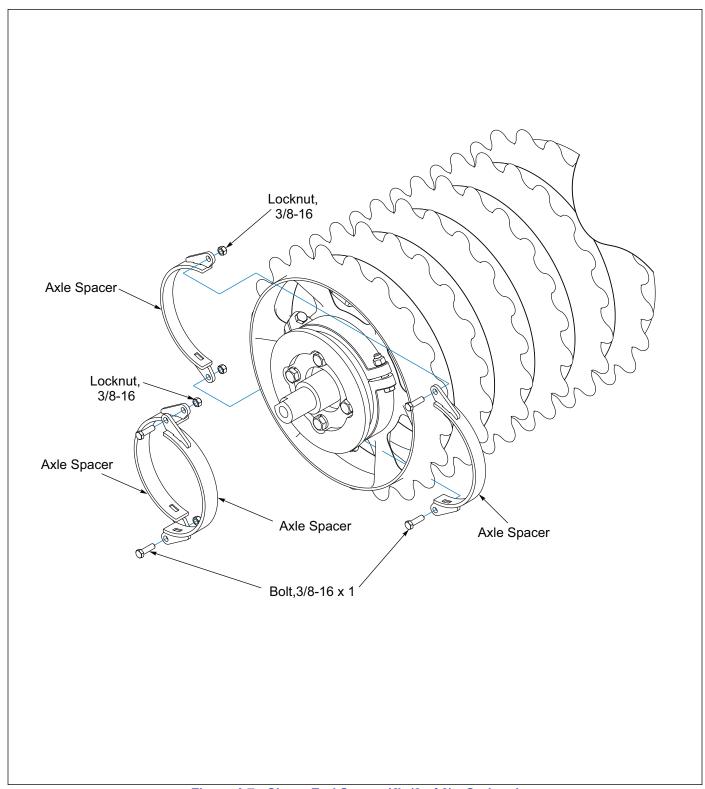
Clamp End Spacer Kit (2 of 2) - Optional
